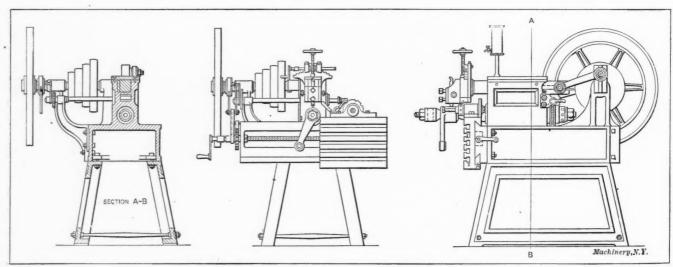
Compound Planing Machine or Shaper. Nasmyth & Gaskell
